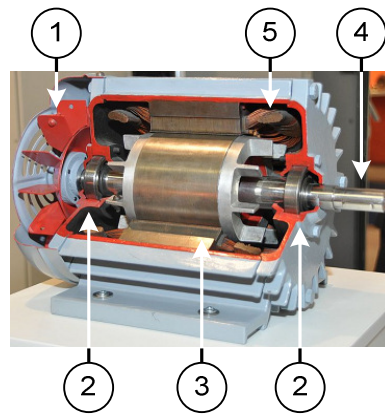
Interior structure (compact view)² of a three-phase IM: (1) cooling fan, (2) bearings, (3) rotor, (4) shaft, (5) stator and stator windings.
